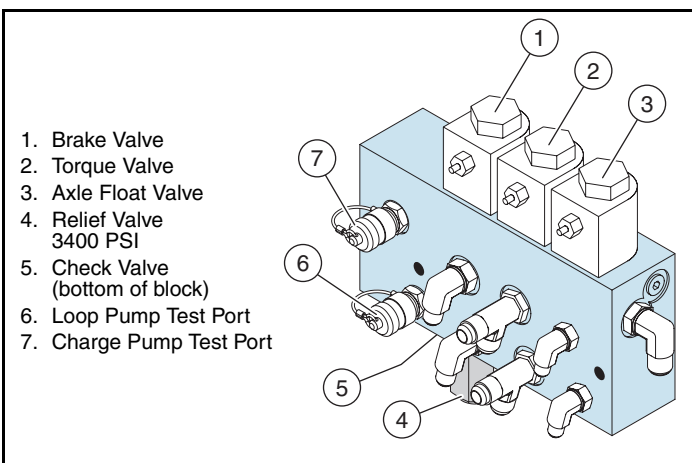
Late Model Drive Valve Block - 3-Valve
